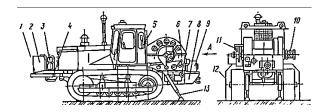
Hoisting winch LPT-8: 1 — frame; 2 — fuel tank; 3 — air balloons; 4 — compressor; 5 — control panel; 6 — winch; 7 — universal joint shaft; 8 — console frame; 9 — gearbox; 10 — safety coil; 11 — rotor drive mechanism; 12 — detachable extension ladder; 13 — folding screw support.
